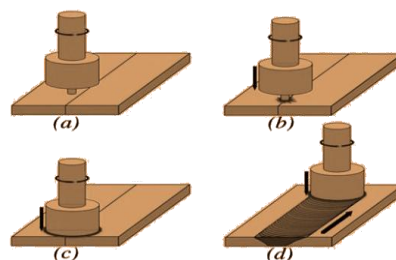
Schematic representation of FSW process; a) Rotating tool before plunging, b) Plunging stage, c) Tool shoulder touches the work piece surface producing frictional heat, d) Rotating tool traverses along the work piece.
